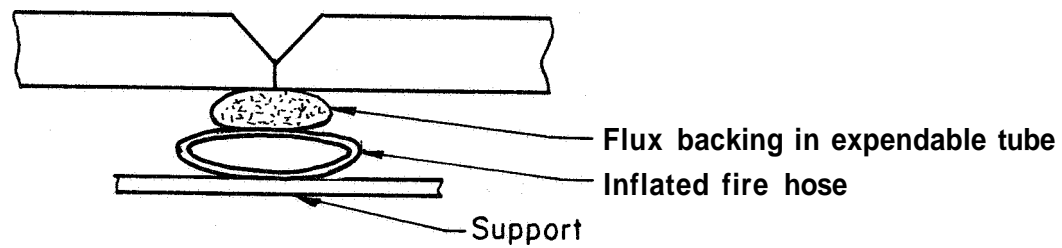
METHODS OF BACKING THE JOINT IN SUBMERGED-ARC WELDING TO PREVENT BURNTHROUGH
